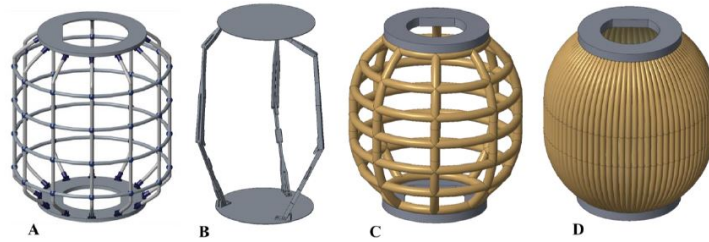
Designs of LEIA inner structure: A) Constructible truss, B) Deployable mechanism, C) Inflatable beam truss, D) Inner inflatable wall
